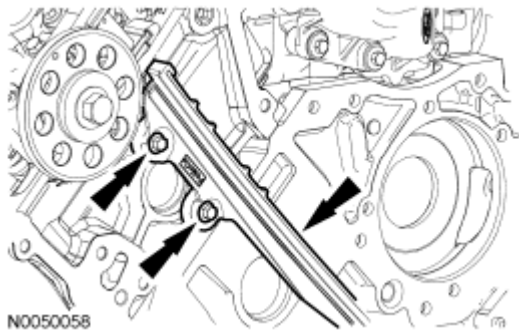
Locating RH Primary Timing Chain Guide Bolts
